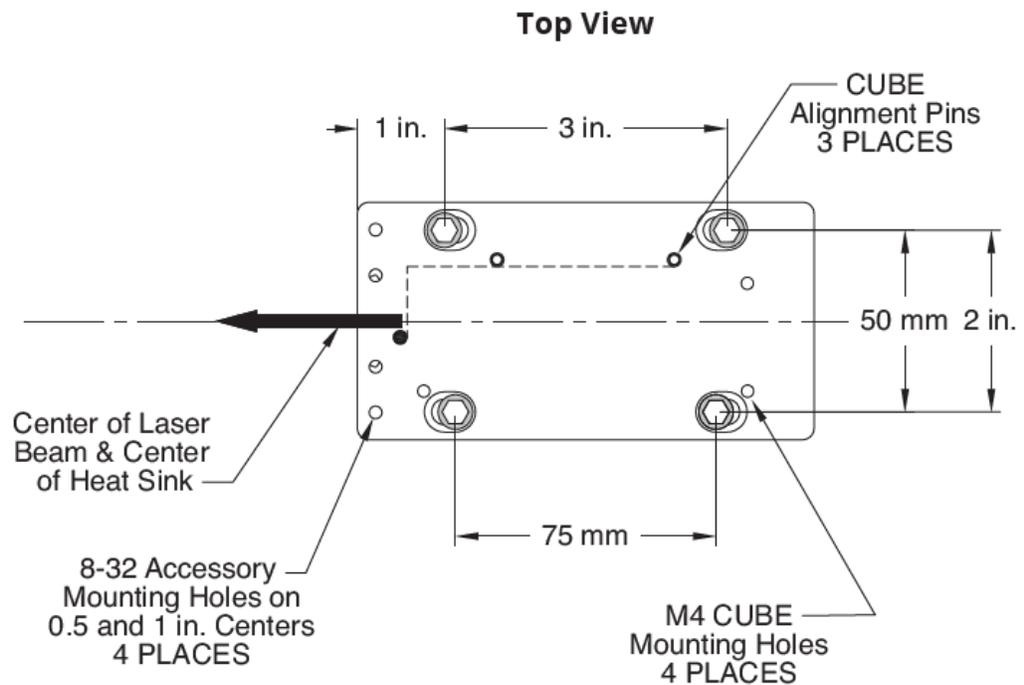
Mounting Holes — Optional CUBE Heat Sink
